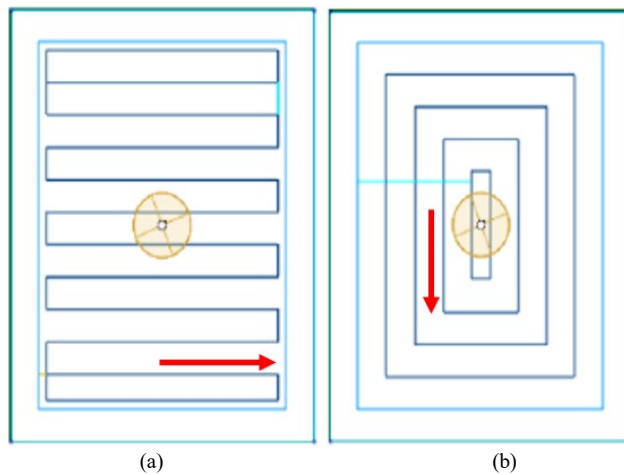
Machining tool path: (a) Parallel (b) Equidistant
